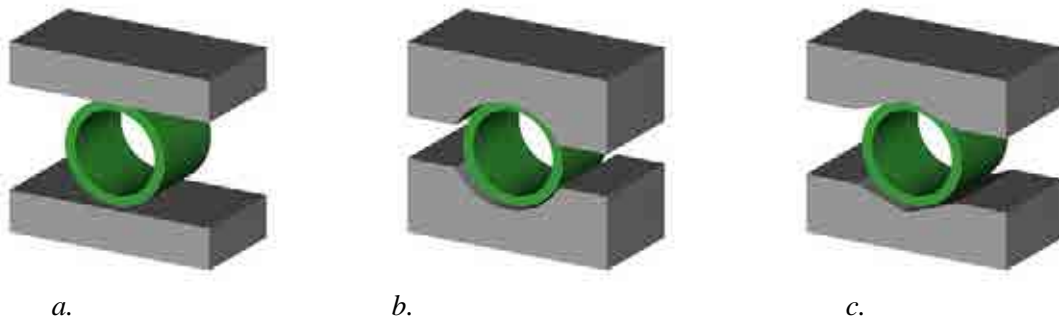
Different plane sheets of the tool. (a) shows a horizontal shape, (b) shows a cylindrical shape and the (c) shows a V-shape.
